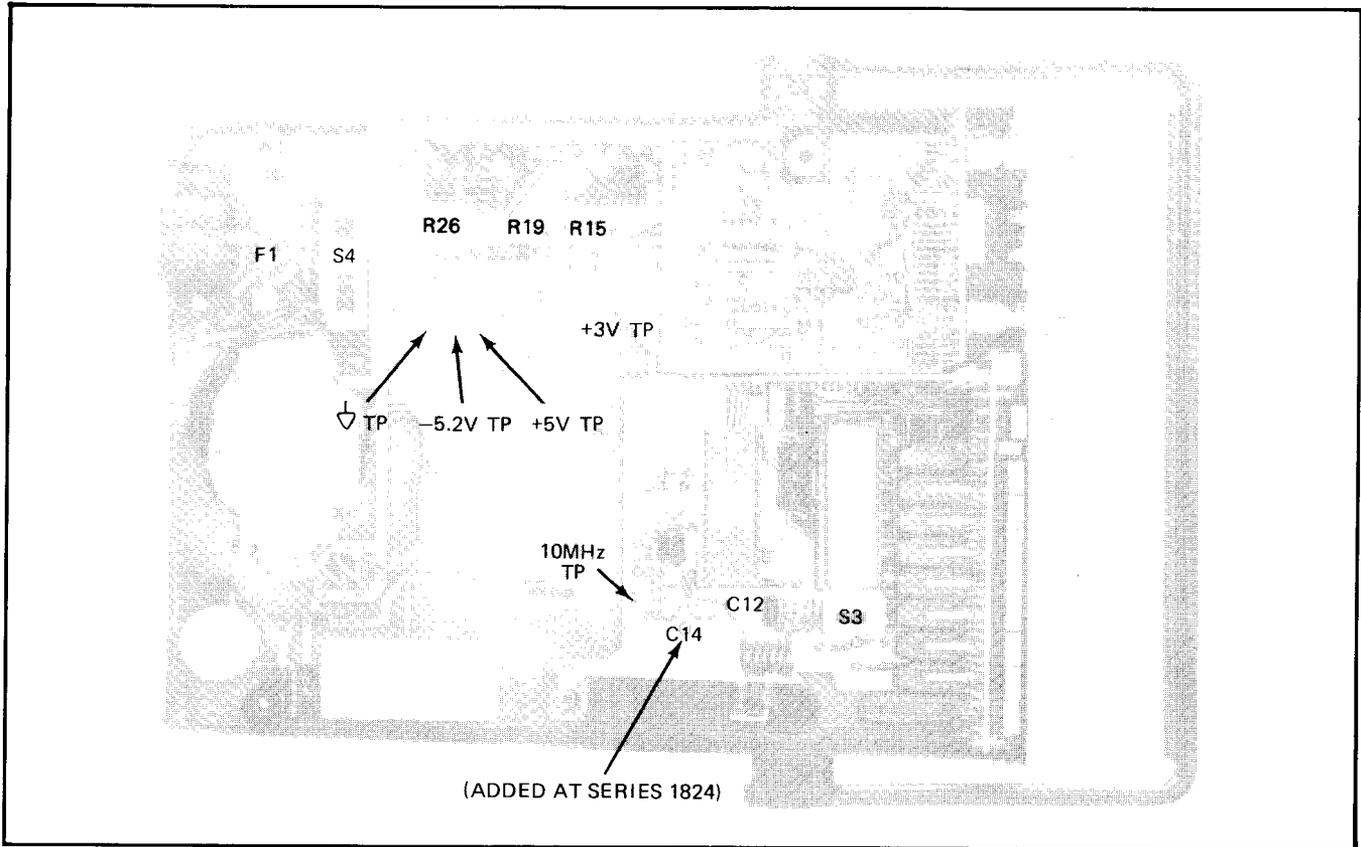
Adjustment Component Locator (A1 Assembly)
